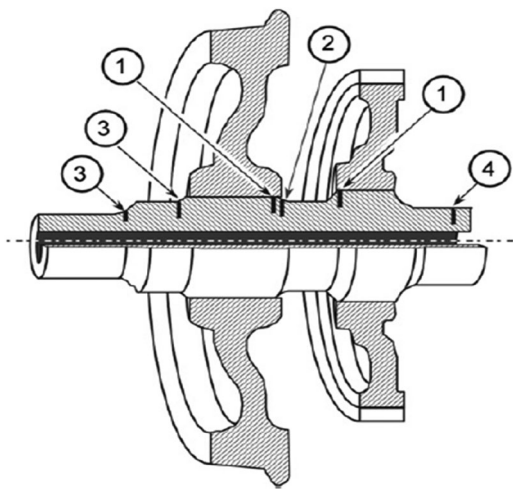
Sites on rail axle susceptible to fatigue failure: (1) press fit cracks beneath the wheel and gears, (2) crack at T notch transition (3) cracks at U and/or V notch transition and (4) cracks initiated largely by corrosion pits at the shaft.⁶
